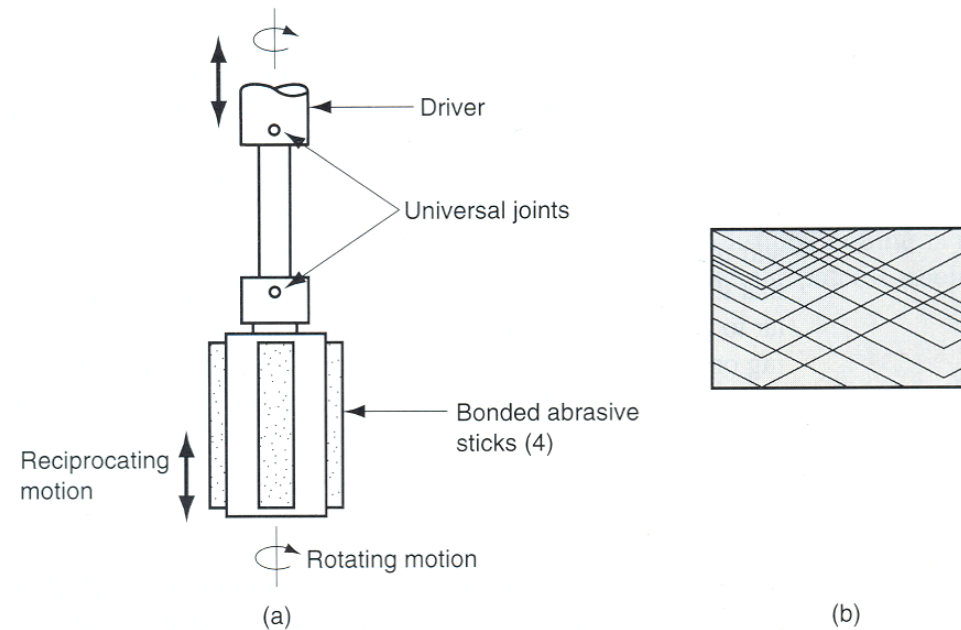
The honing process: (a) the honing tool used for internal bore surfaces
